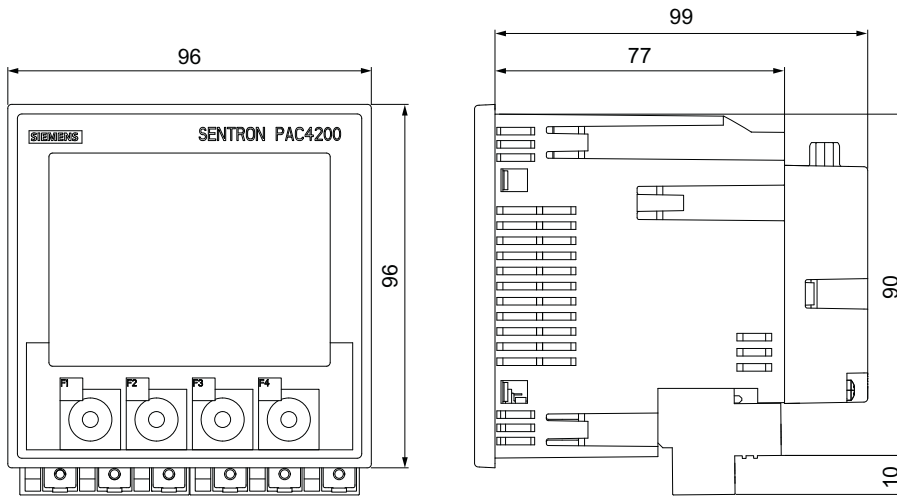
Frame dimensions with optional PAC PROFIBUS DP expansion module connected, device with ring lug terminals
